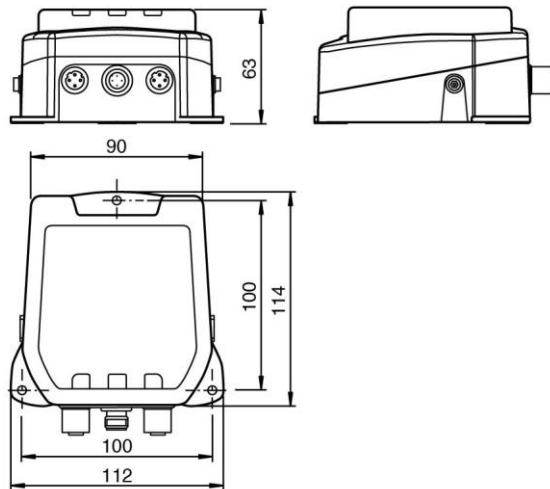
Dimensions of module housing (without host connections, one host connector showed for visualization)
